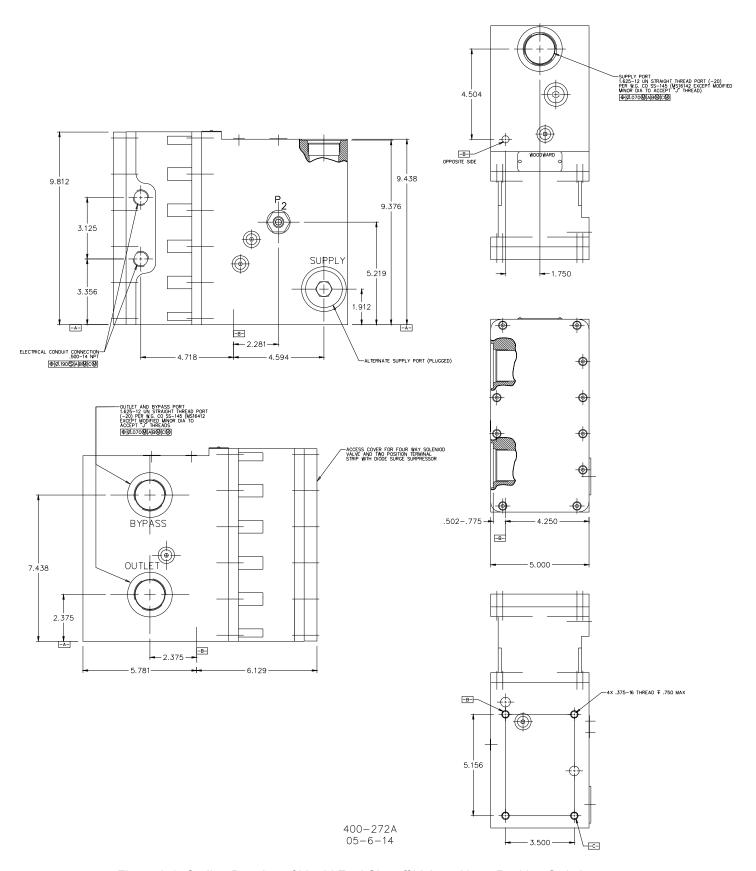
Outline Drawing of Liquid Fuel Shutoff Valve without Position Switch
